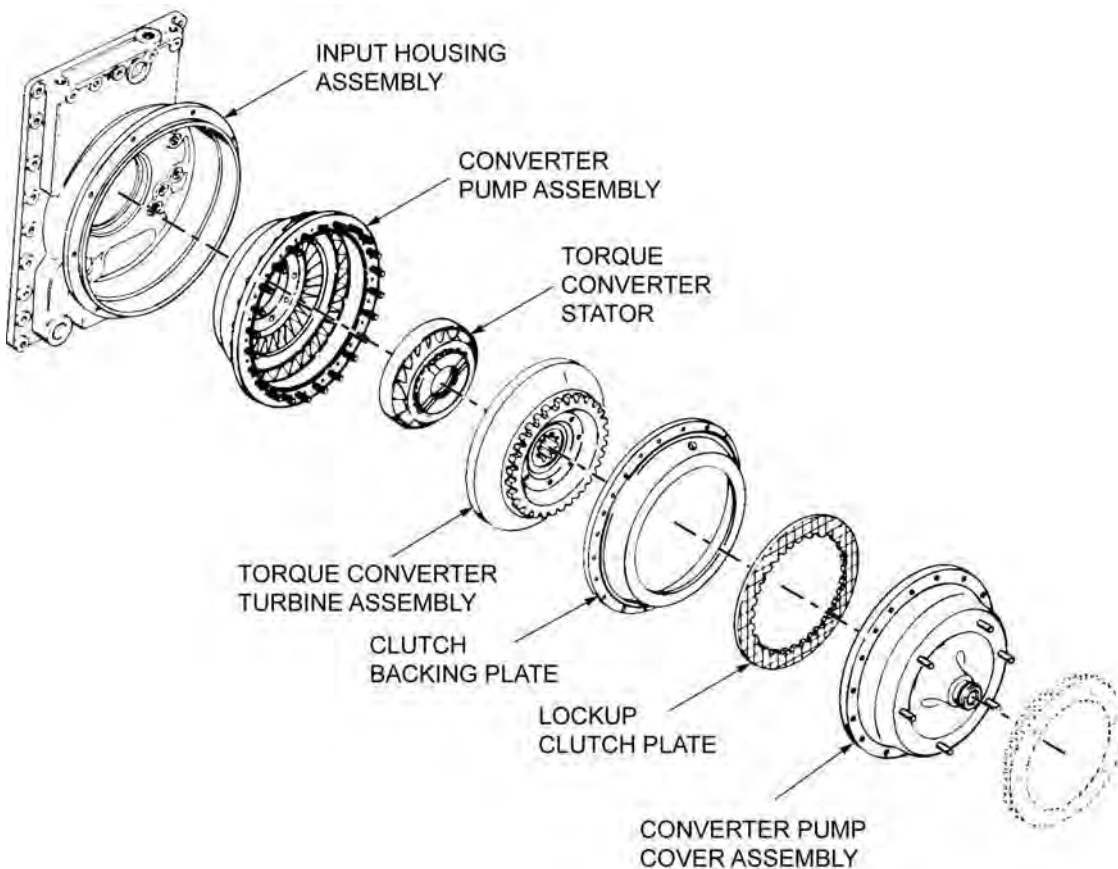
Input Housing and Exploded View of Major Components of the Torque Converter.
